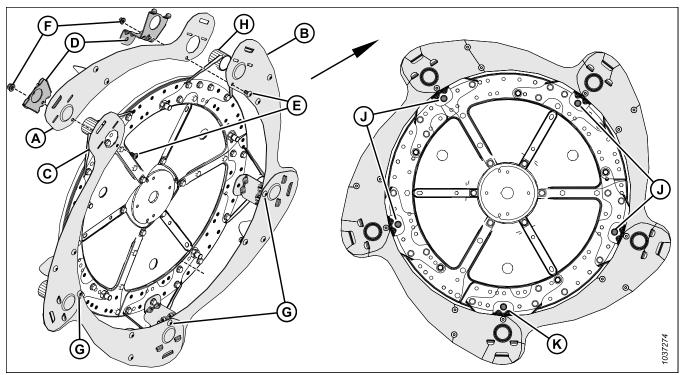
Five-Bat Reel – Assembled Reel Endshields on Reel
